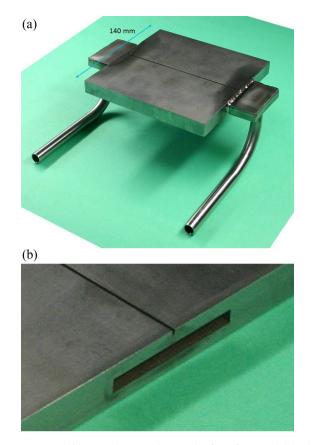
Water-cooled bare steel test mock-up made of Eurofer97 steel. (a) Whole body with cooling tube attachments and (b) cross section showing the cooling channel and a notch groove.
